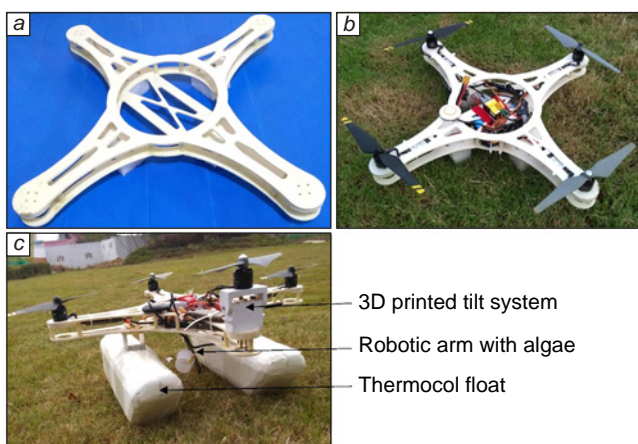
(a) Standardized copter frame manufactured using FFF printing; (b) flight-ready unit; (c) floating unit with sampler.²²² ©Elsevier B.V., 2019.
